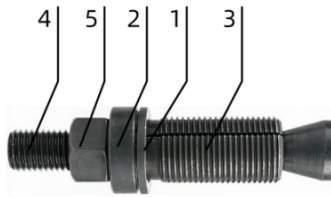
Schematic Diagram of Anchor Bolt Structure
